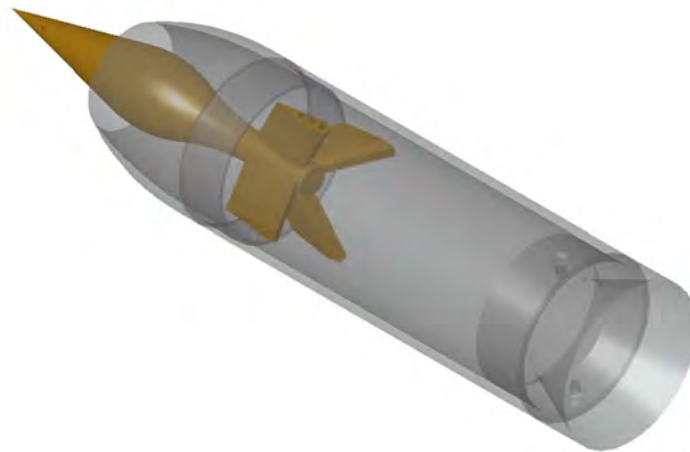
Assembled CAD model showing all parts of the ramjet.
